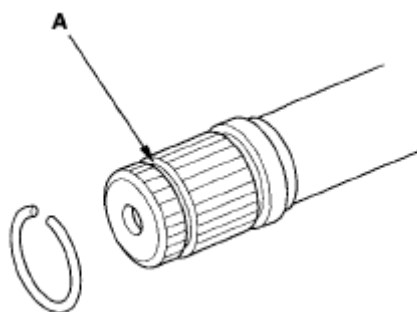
Identifying Stop Ring Into Driveshaft Groove
